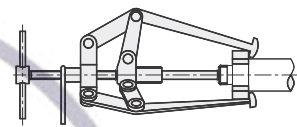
Removal of Inner Ring Using Withdrawal Tool (2)
